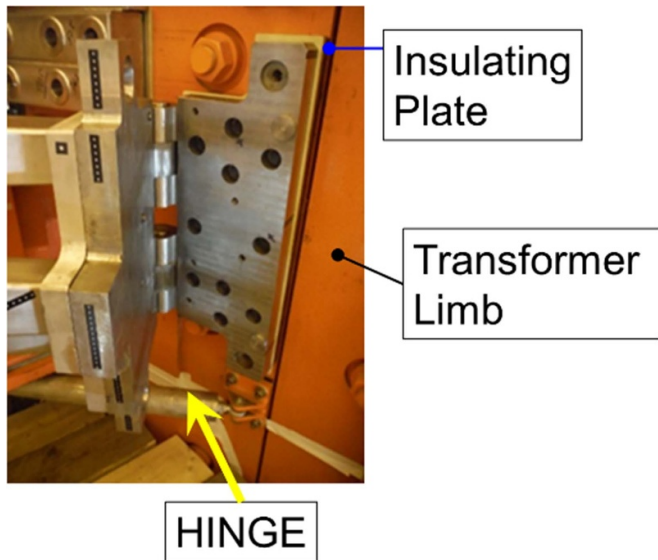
Photo taken during the installation of the assembly of the hinge fixed to the transformer limb. The hinge is shown in the open position. The insulating plate sandwiched between the hinge and the transformer limb is also shown.
